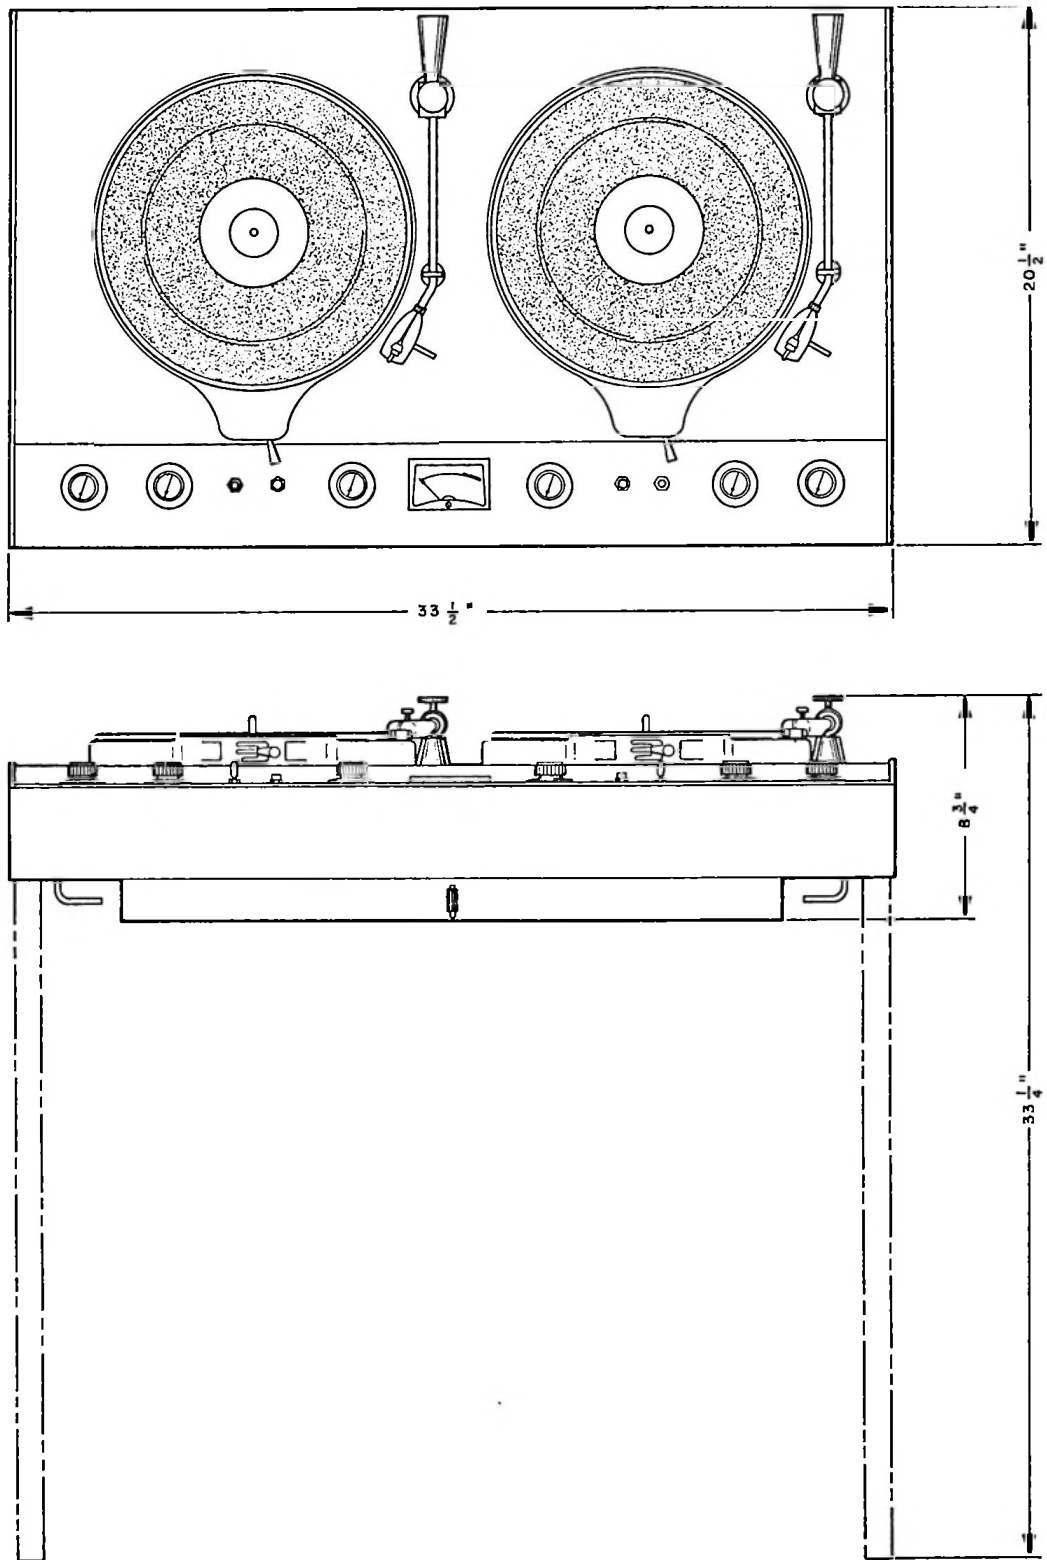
808A-1 Console, Outline and Mounting Dimensions
